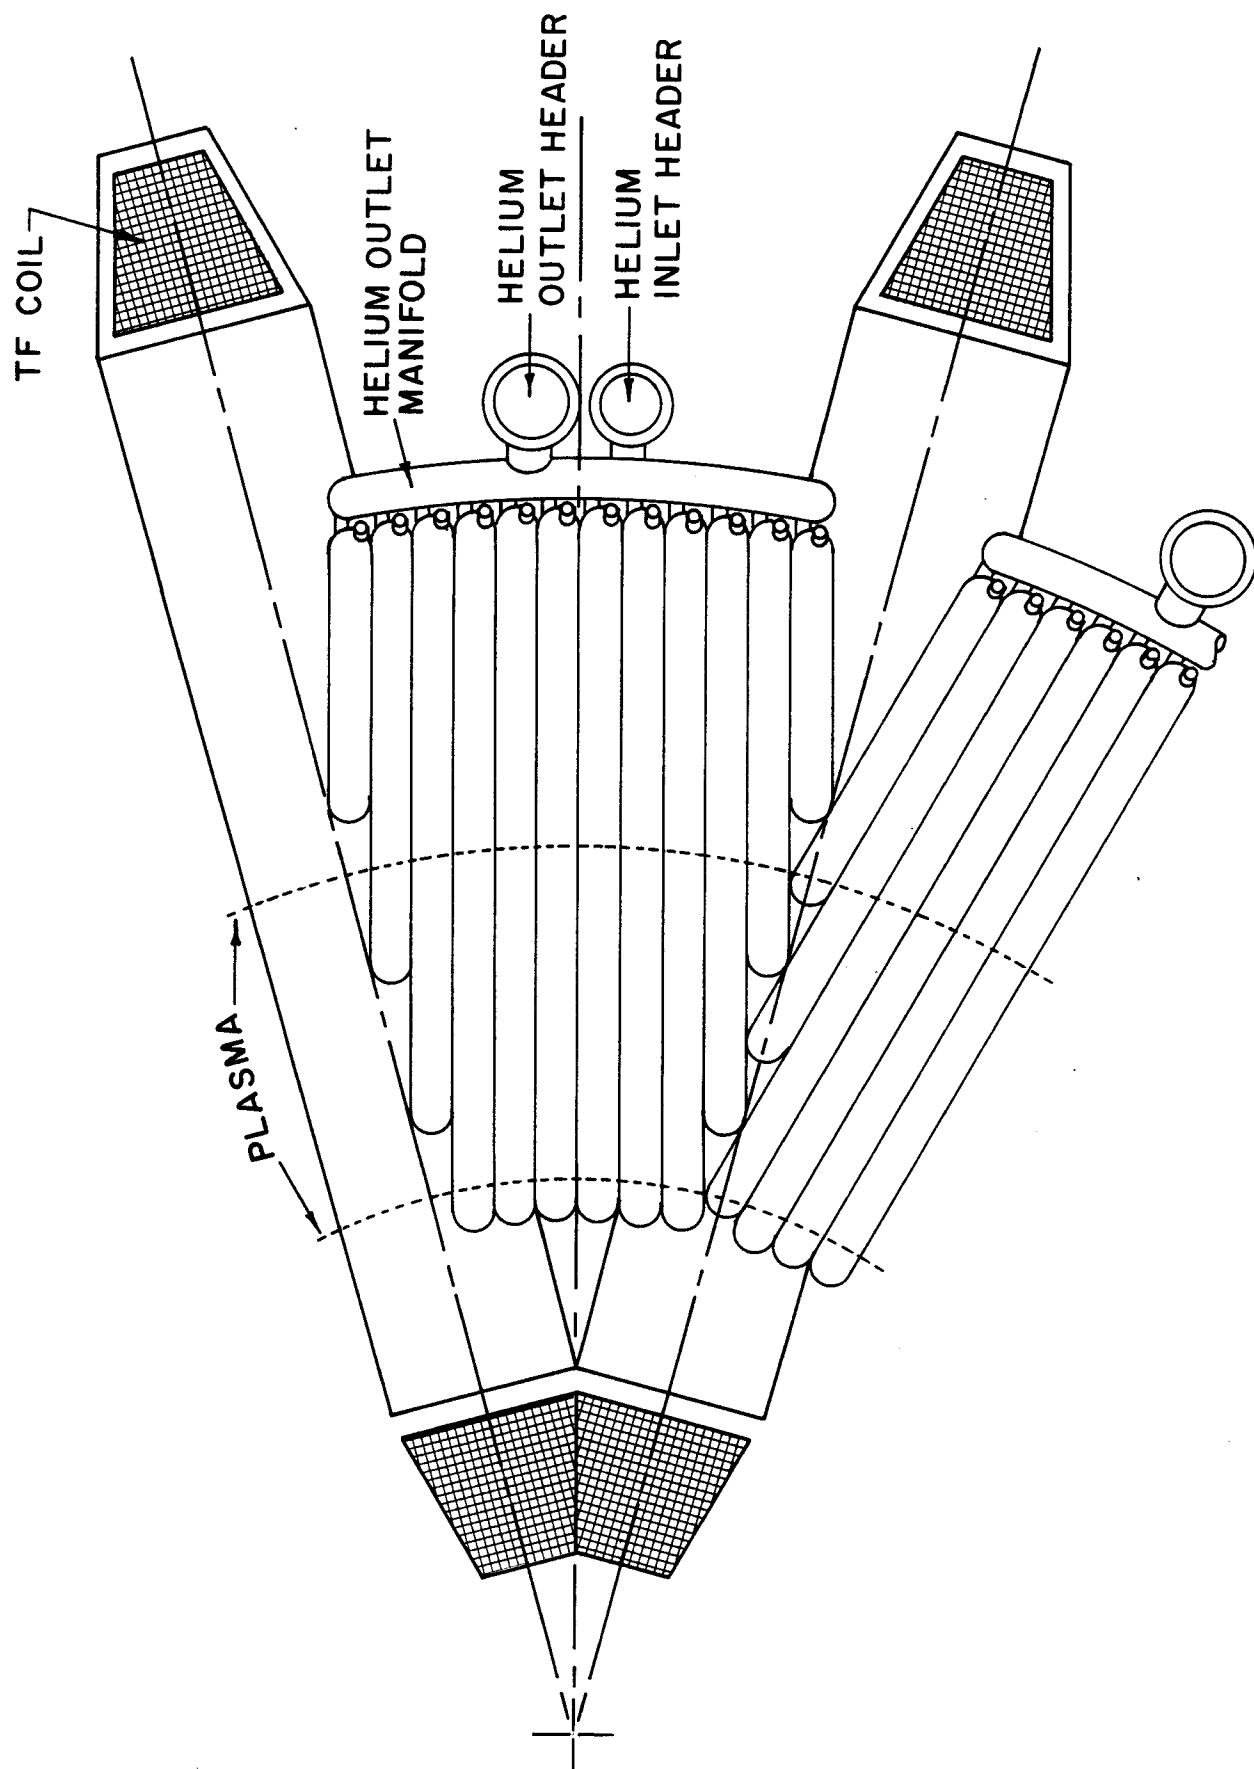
Top view of the first row of cylinders in the upper cylinder blanket assembly.
